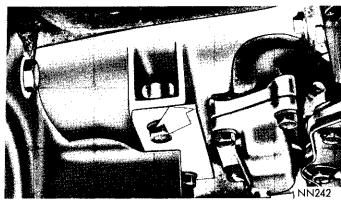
Shim Location (Front Universal Joint Angle Correction)
